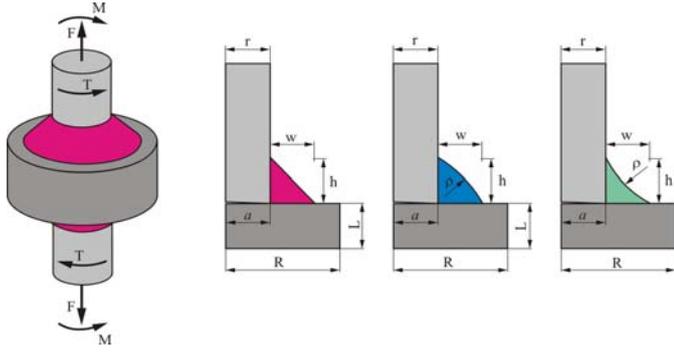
Fillet welds in cylindrical parts; loading and geometry.
